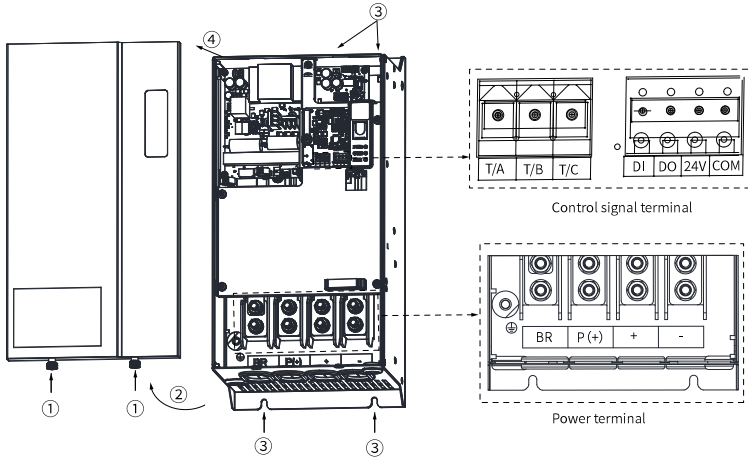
Terminal layout of the MDBUN-200-7T braking unit
